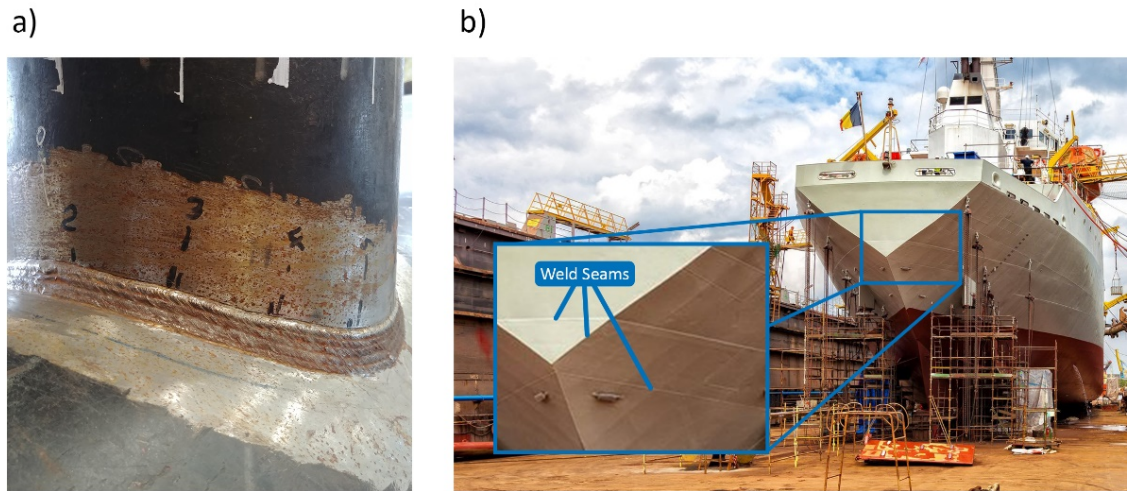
a) Saddle weld in pipe structure; b) weld seams in ship hull.
